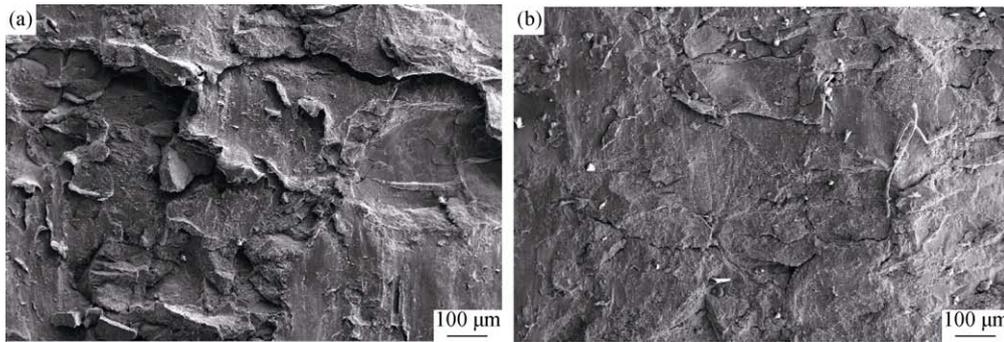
SEM micrographs of the fracture surface of the explode-rolled clad plate: (a) low carbon steel; (b) CP-Ti.
